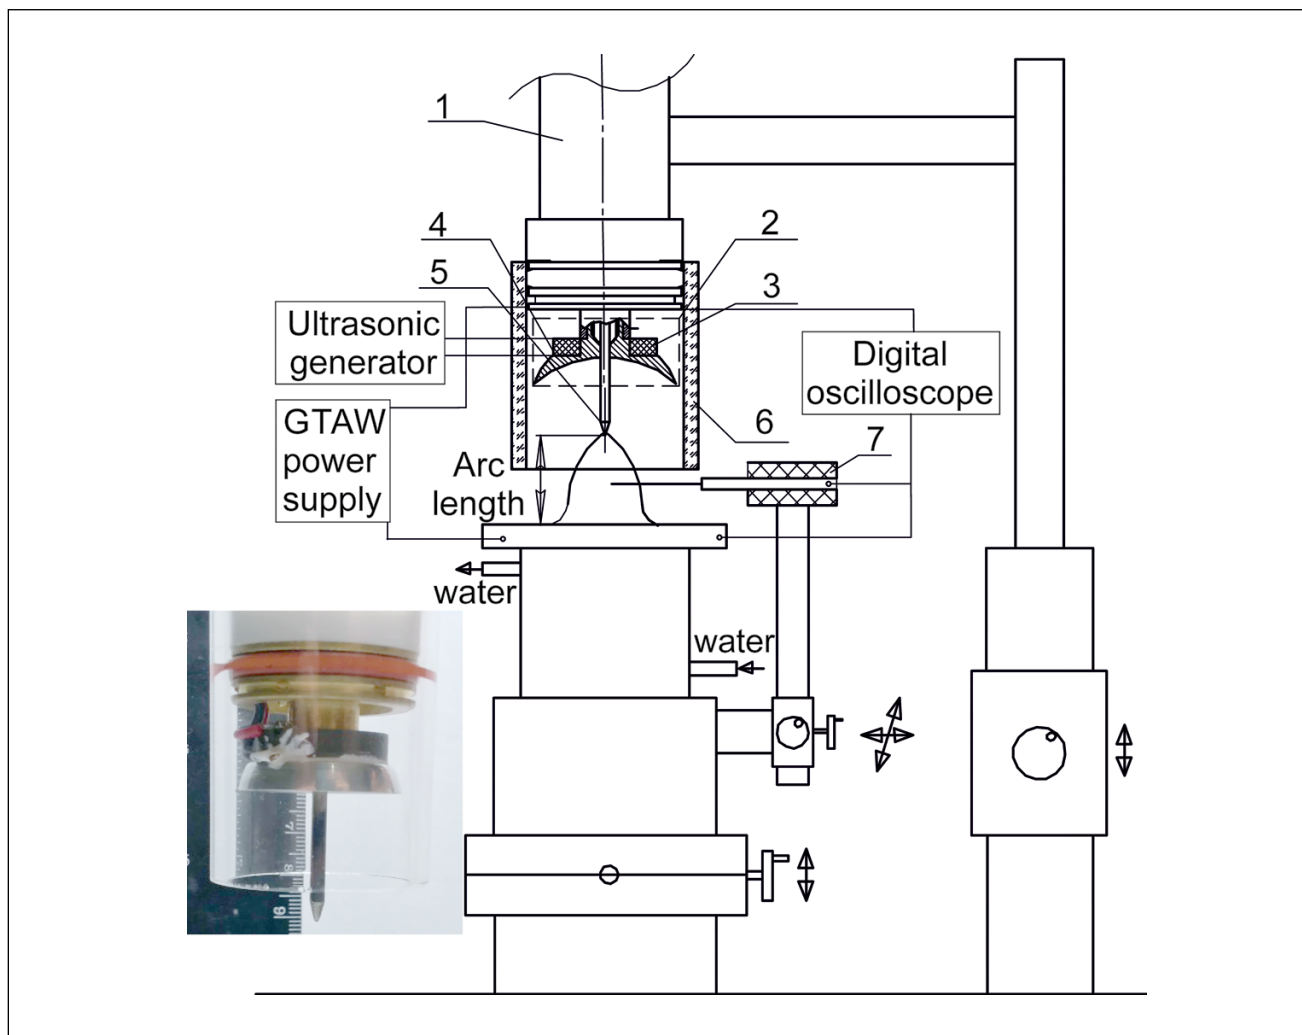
Schematic diagram of the setup for probing the welding arc: 1 — Welding torch; 2 — piezoelectric transducer; 3 — piezoelement; 4 — focusing lens; 5 — non-consumable electrode; 6 — protective nozzle; 7 — scanning probe.
